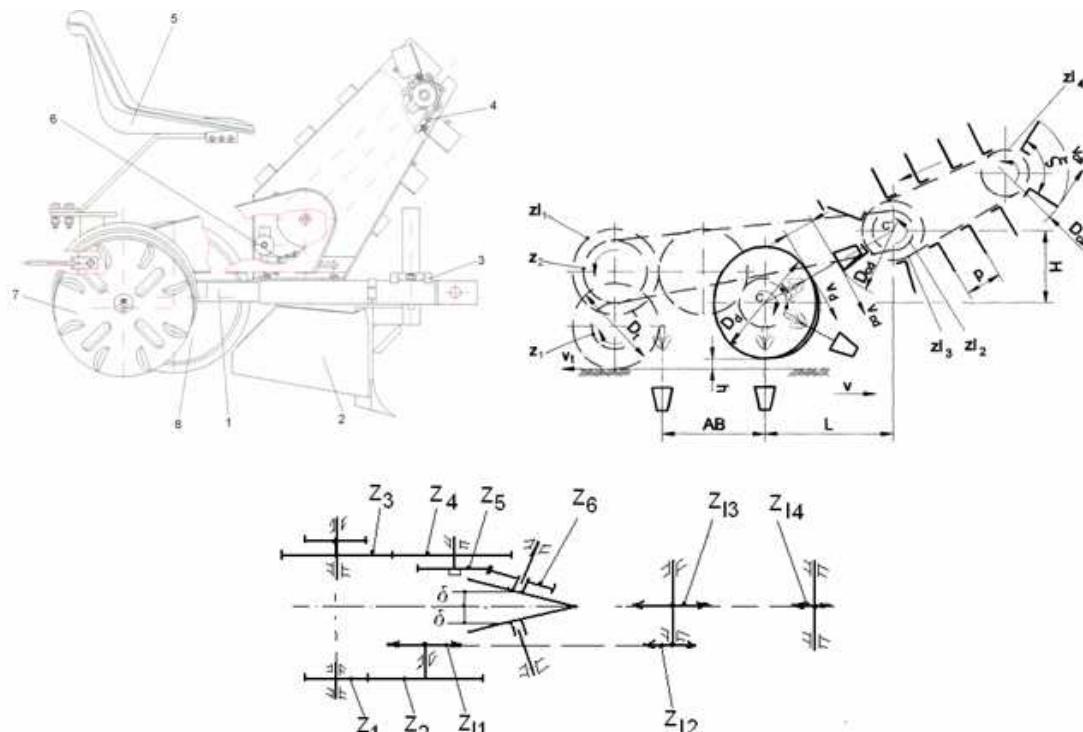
Machine of planting vegetables seedlings - PLANT / Mașina de plantat răsaduri - PLANT
